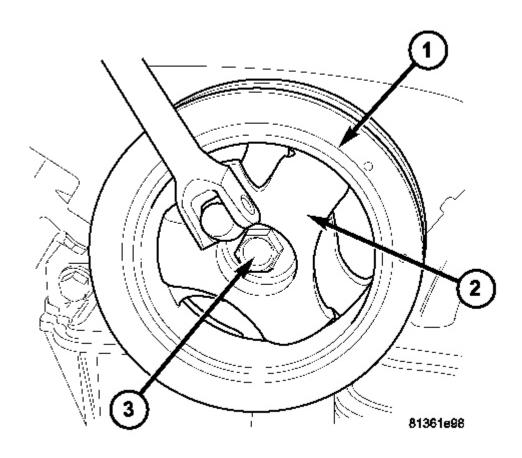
Installing Crankshaft Damper Bolt Courtesy of CHRYSLER LLC
